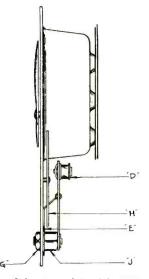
Side view of Models 686B, 786 and 822 dial mechanism with newer type take-up assembly in place.
